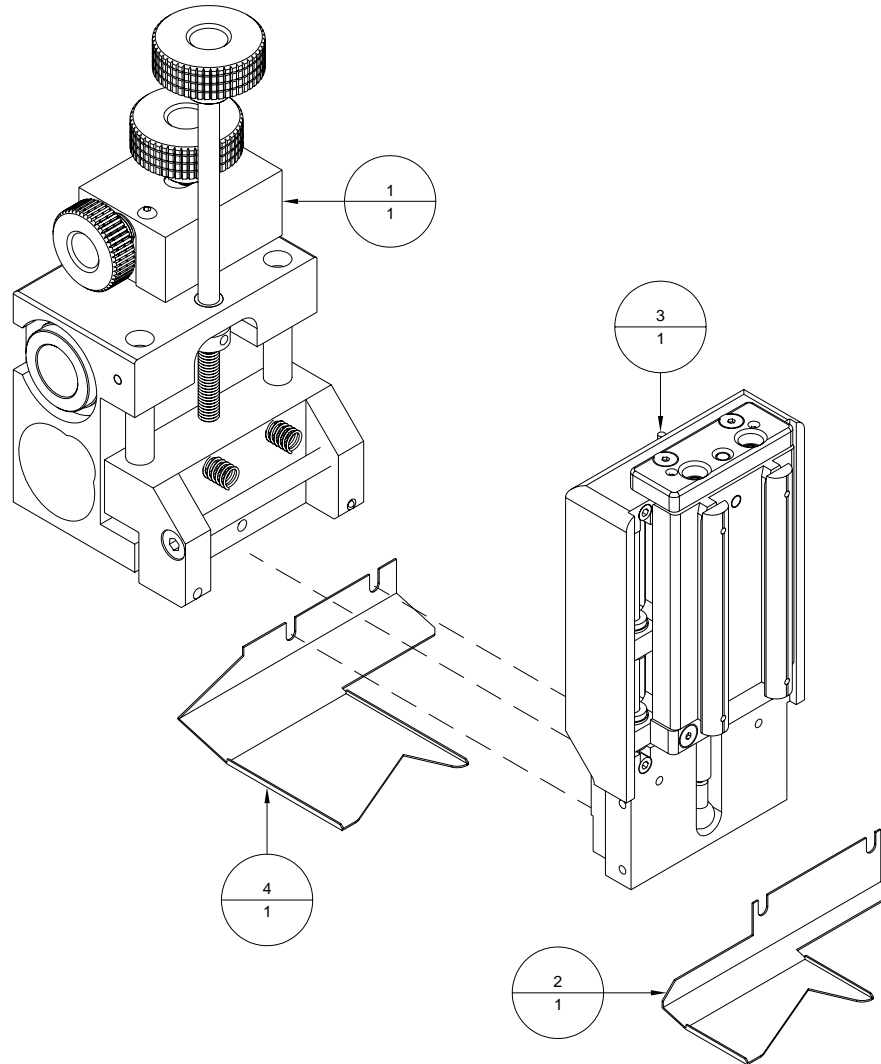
Mount, Printhead 2250/3250, BK80 (BK80M-4, BK80M-6)
